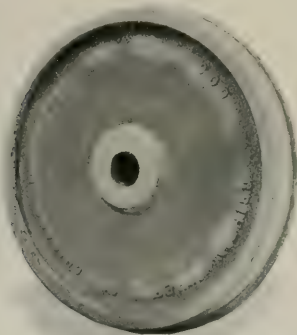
33-IN. 525-LB. DOUBLE PLATE WHEEL.
